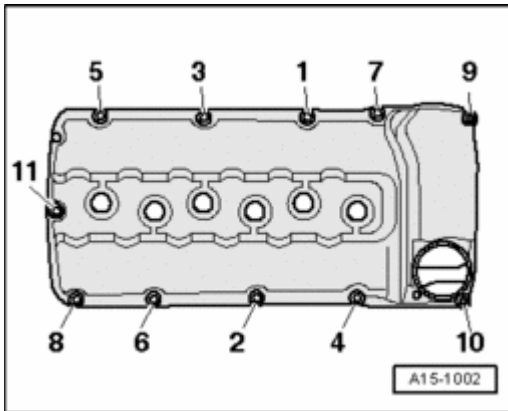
Unscrewing Cylinder Head Cover Bolts In Sequence
